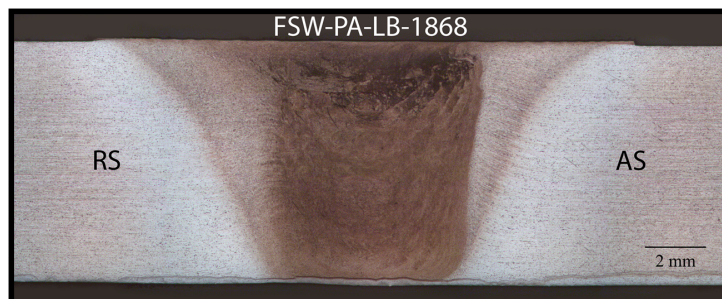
Macrograph of the weld FSW-PA-LB-1868 (7 mm/s; 900 rpm).
